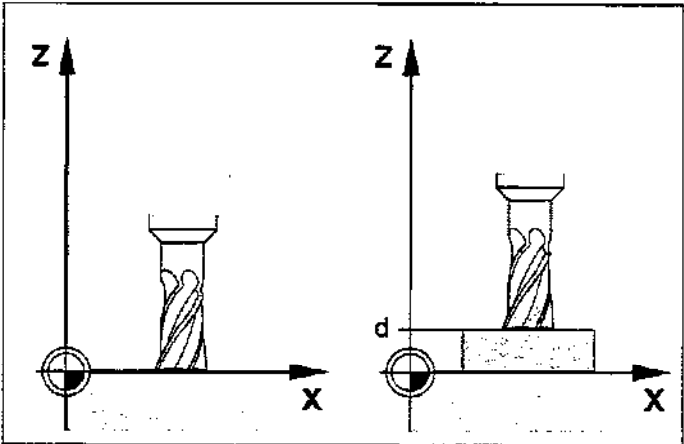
Workpiece setting in the tool axis; *right*, with protective shim
